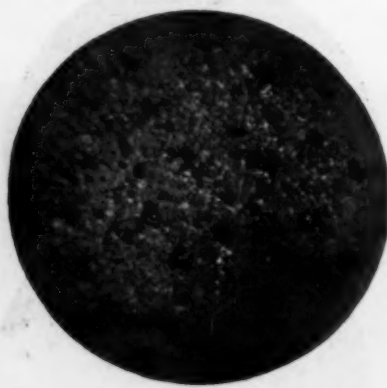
Inclosed Gas (Copper-Tin-Lead Bearing).
